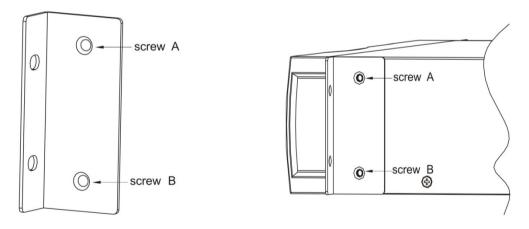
Cabinet installation bracket Figure 11 Cabinet installation bracket assembly
